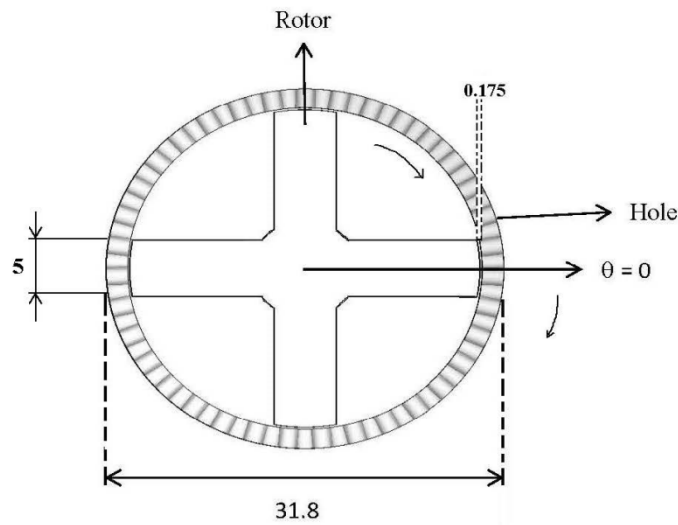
Top view of the proposed rotor-stator mixer assembly
